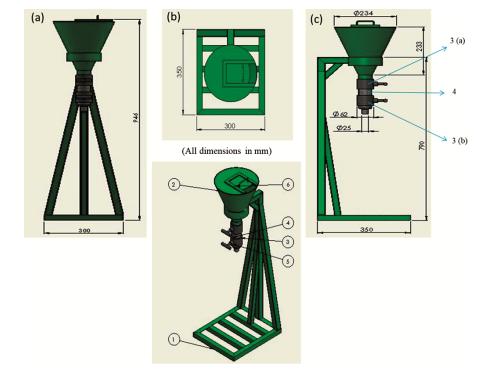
Orthographic view of spawn spreading machine: (a) front view, (b) top view; (c) right side view; Captions—(1) base Frame, (2) conical hoper, (3a) ball valve-1, (3b) ball valve-2, (4) measuring jar/cylinder, (5) ball valve handle/knob, (6) lid
